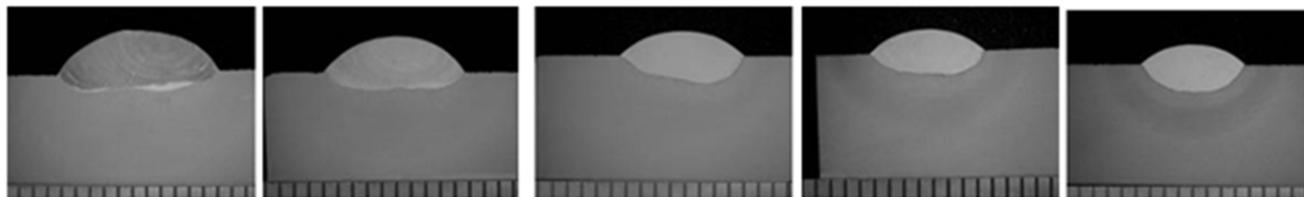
Photo macrographs of typical transverse sections of single weld bead produced by increasing welding speed. Note the different magnifications in the photographs [3].
